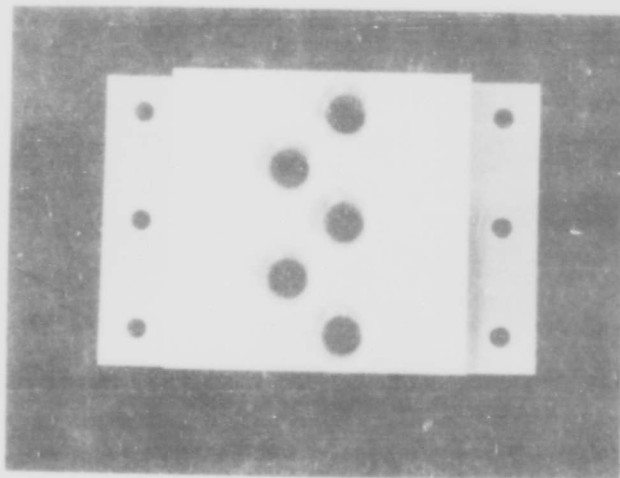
Test Plate With 5-0.500 In. Diameter Holes
